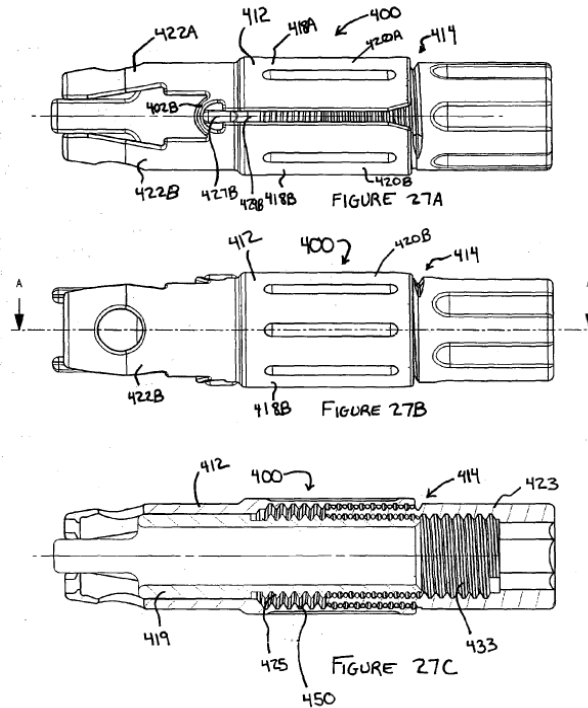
A is a side view of an instrument for adjusting a spinal rod relative to a bone anchor, illustrating a rod adjusting tool positioned within a bone anchor engaging too. Ex. 1003 ¶ 51. Figure 27B is a side view of the instrument shown in Figure 27A, and Figure 27C is a side view in cross section of this instrument. *Id.* ¶¶ 52, 53.
